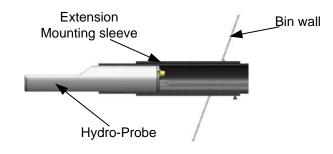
Hydro-Probe installed in an Extension Mounting Sleeve
